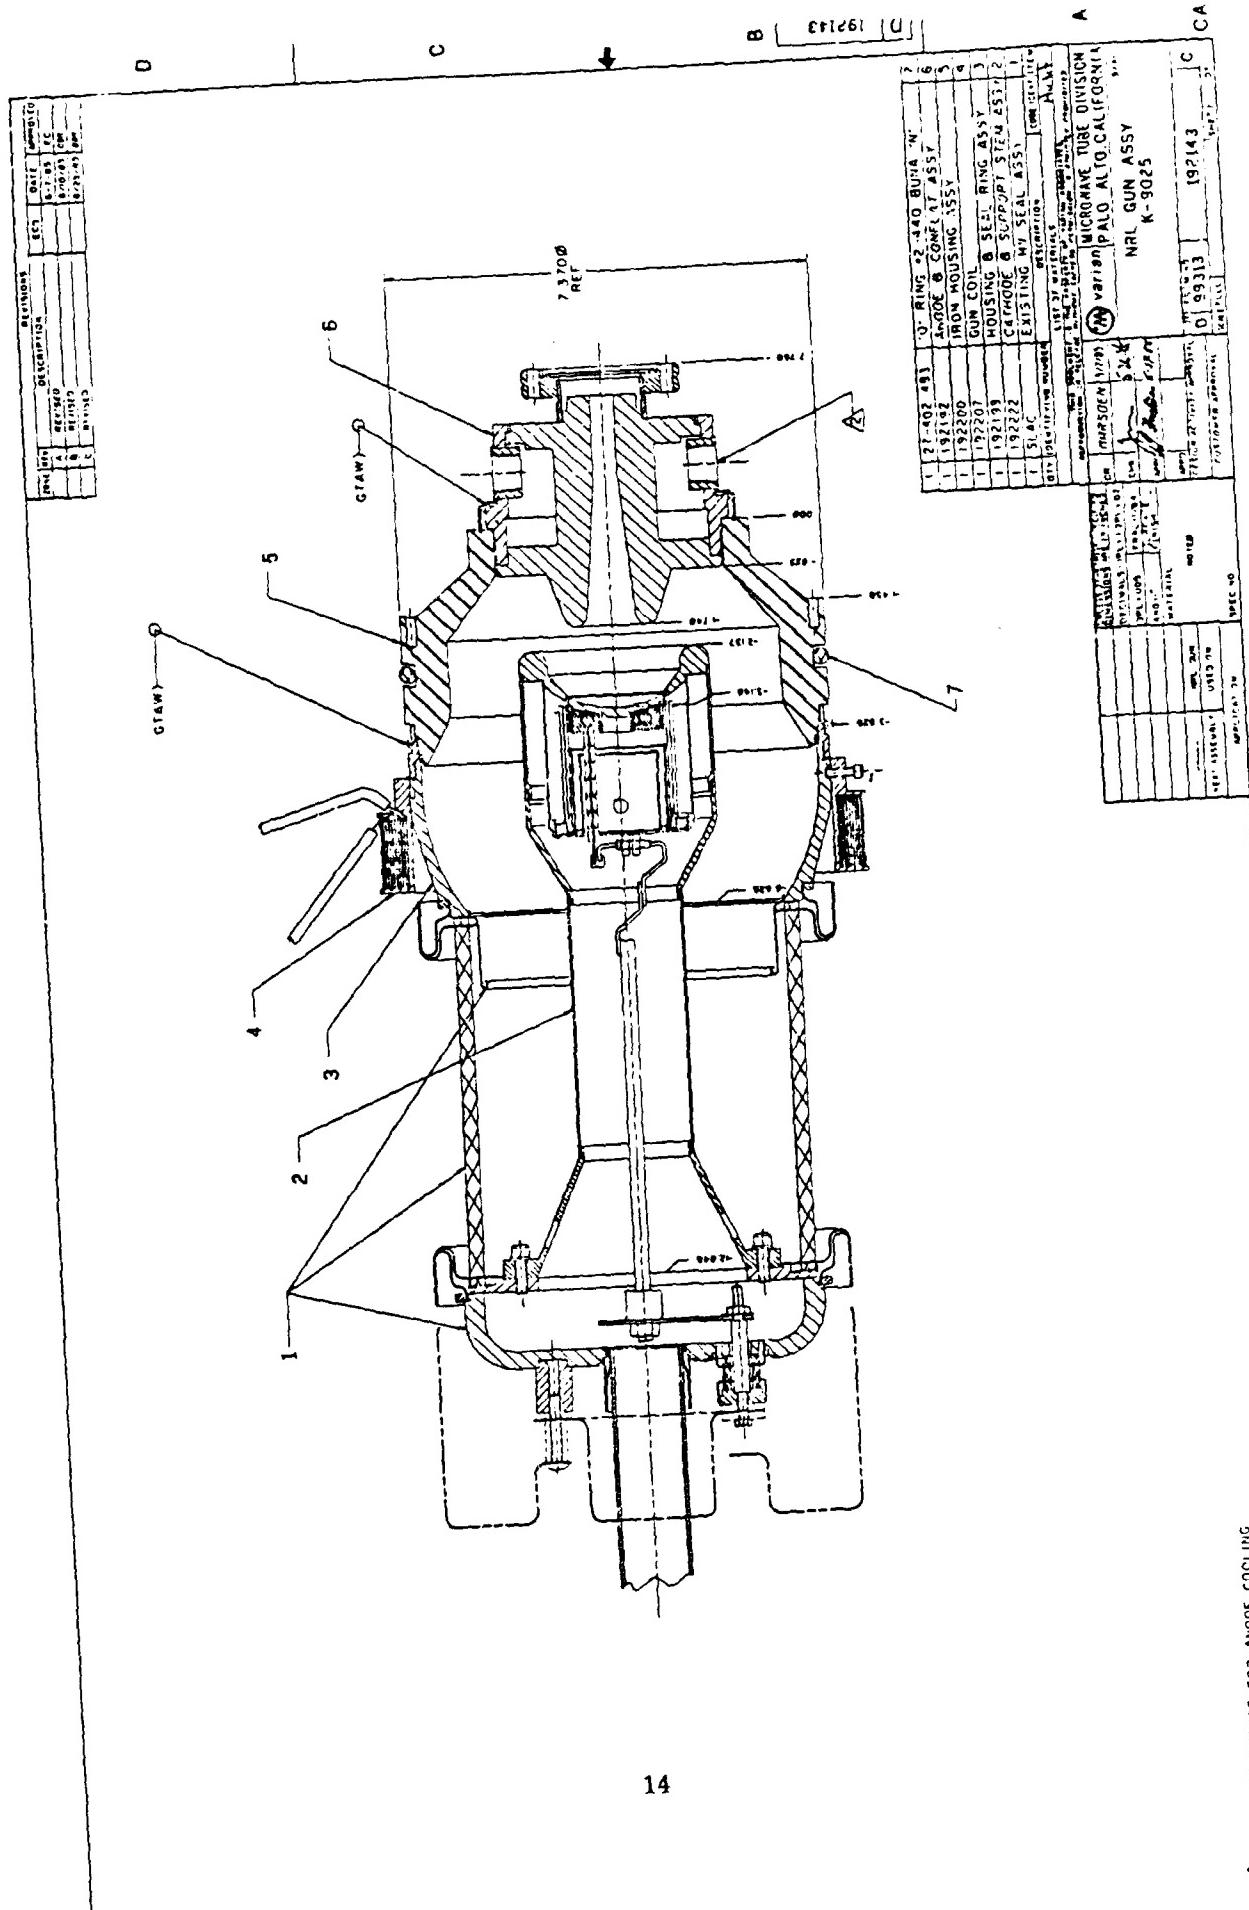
ELECTRON GUN ASSEMBLY DRAWING (R. JONES).
